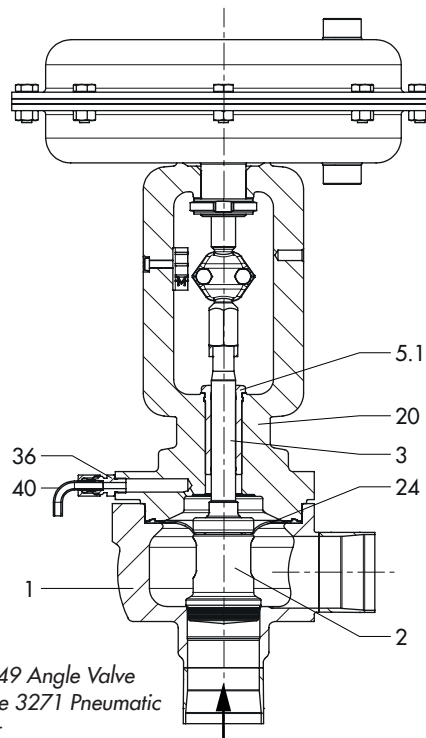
Type 3349 Angle Valve with Type 3271 Pneumatic Actuator
